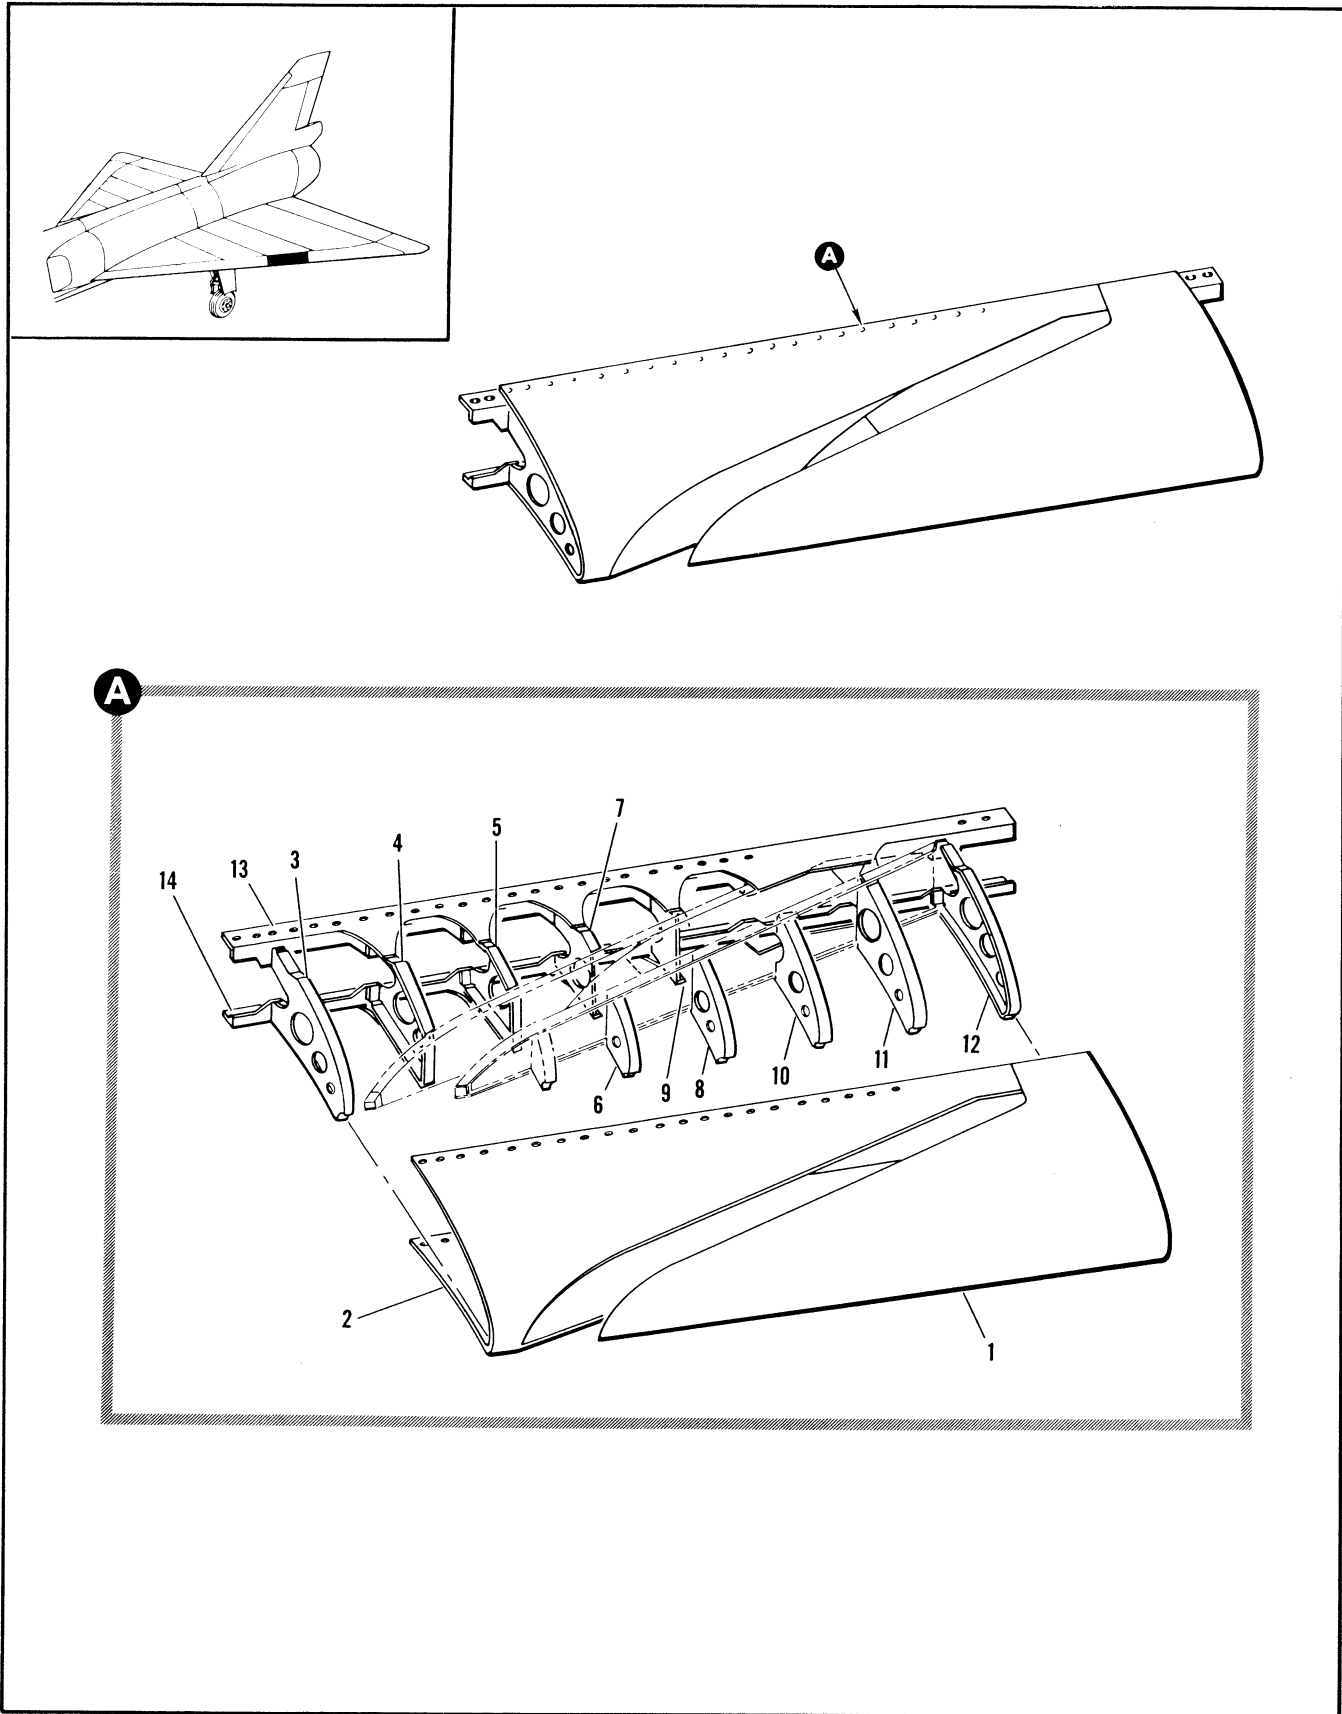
Wing Slotted Leading Edge Assembly Sta 301 to 334
